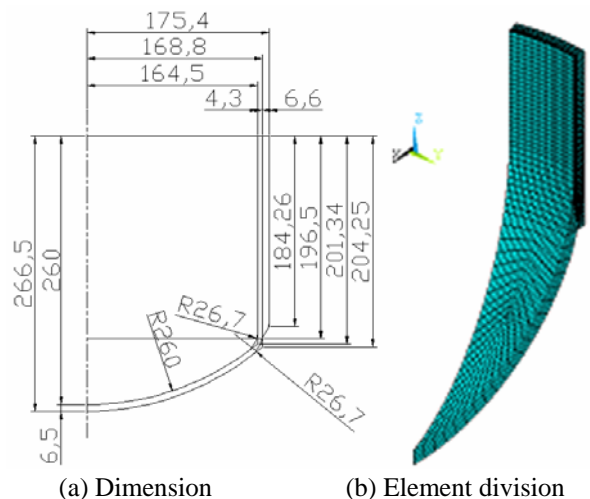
The dimension, shape and element division of the model of Type II fuel storage vessel
